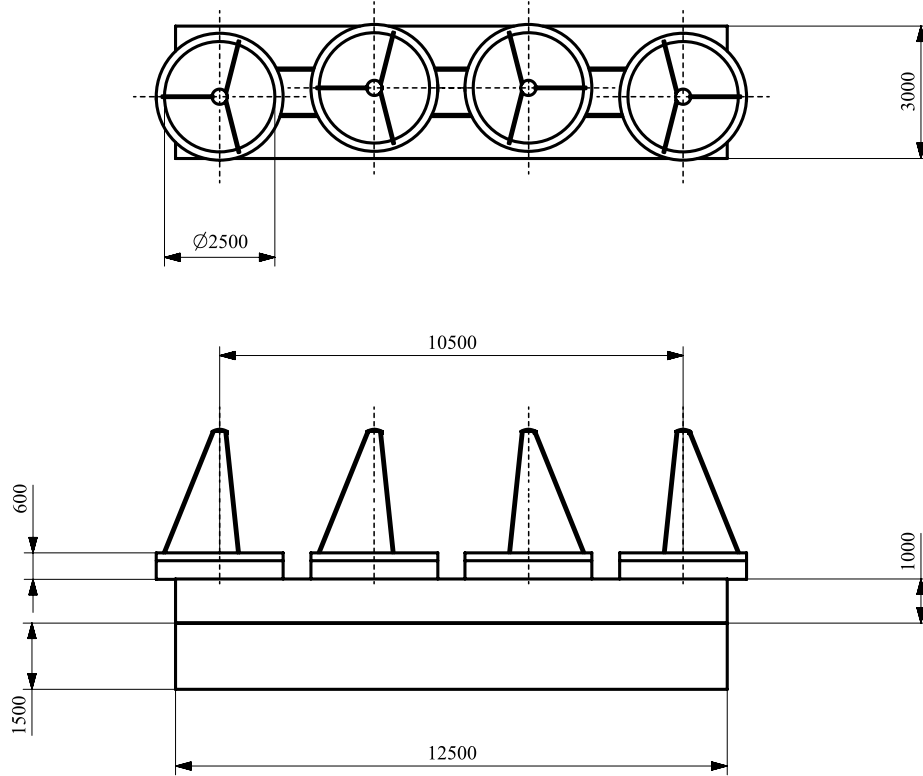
Draft of the CAD model of the deployed configuration of the foldable mirror structure. Dimensions in mm.
